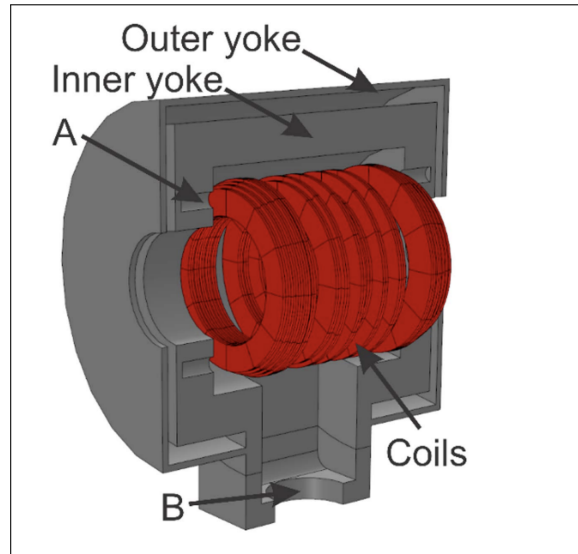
Cross section of magnetic assembly. Label A shows feature for axial suspension of coil pack. Label B shows the entry point for the cryocooler. [17]
